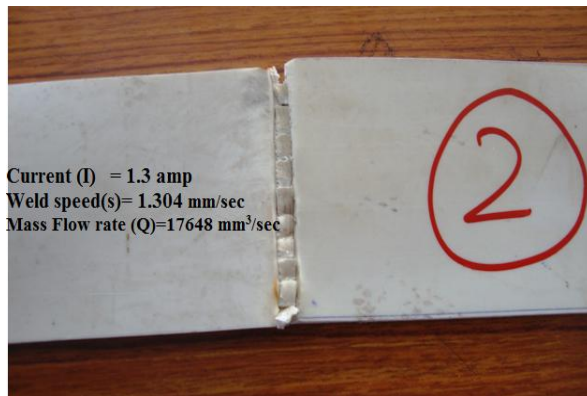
Weld bead formed in 2<sup>nd</sup> experiment
